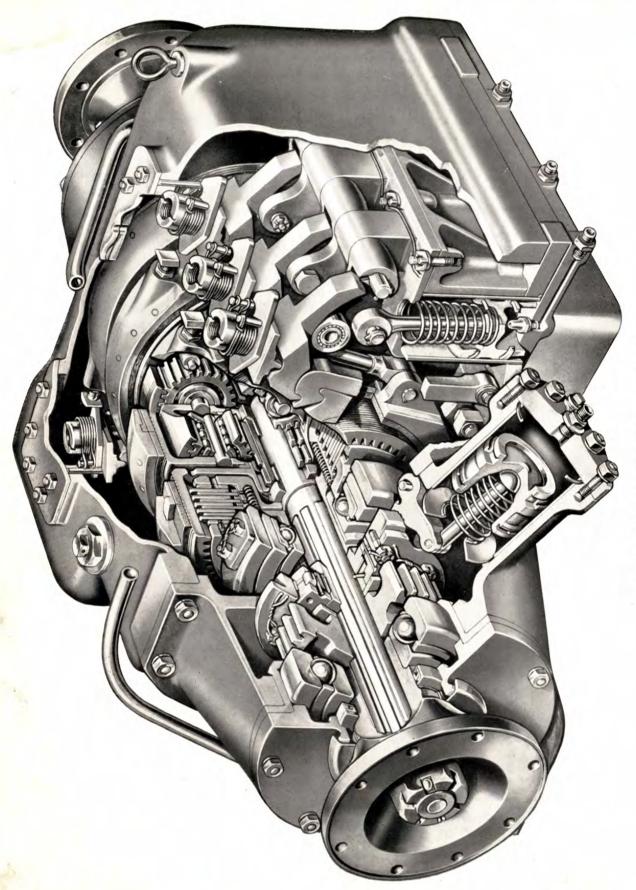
CUT-AWAY VIEW OF THE GEARBOX
